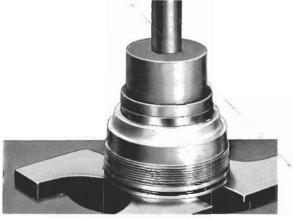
Outer race being pressed out of final drive side cover (use same tools for adjusting ring).
